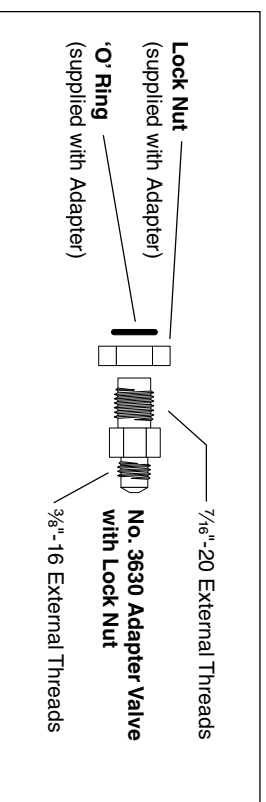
No. 3630 Adapter Valve with Lock Nut.
